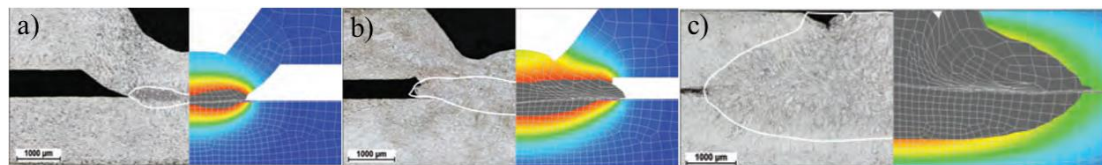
a) Initial steps of projection welding under lower welding forces; b) Intermediate steps of projection welding under lower welding forces; c) Last steps of projection welding under lower welding forces (Mikno 2016).
